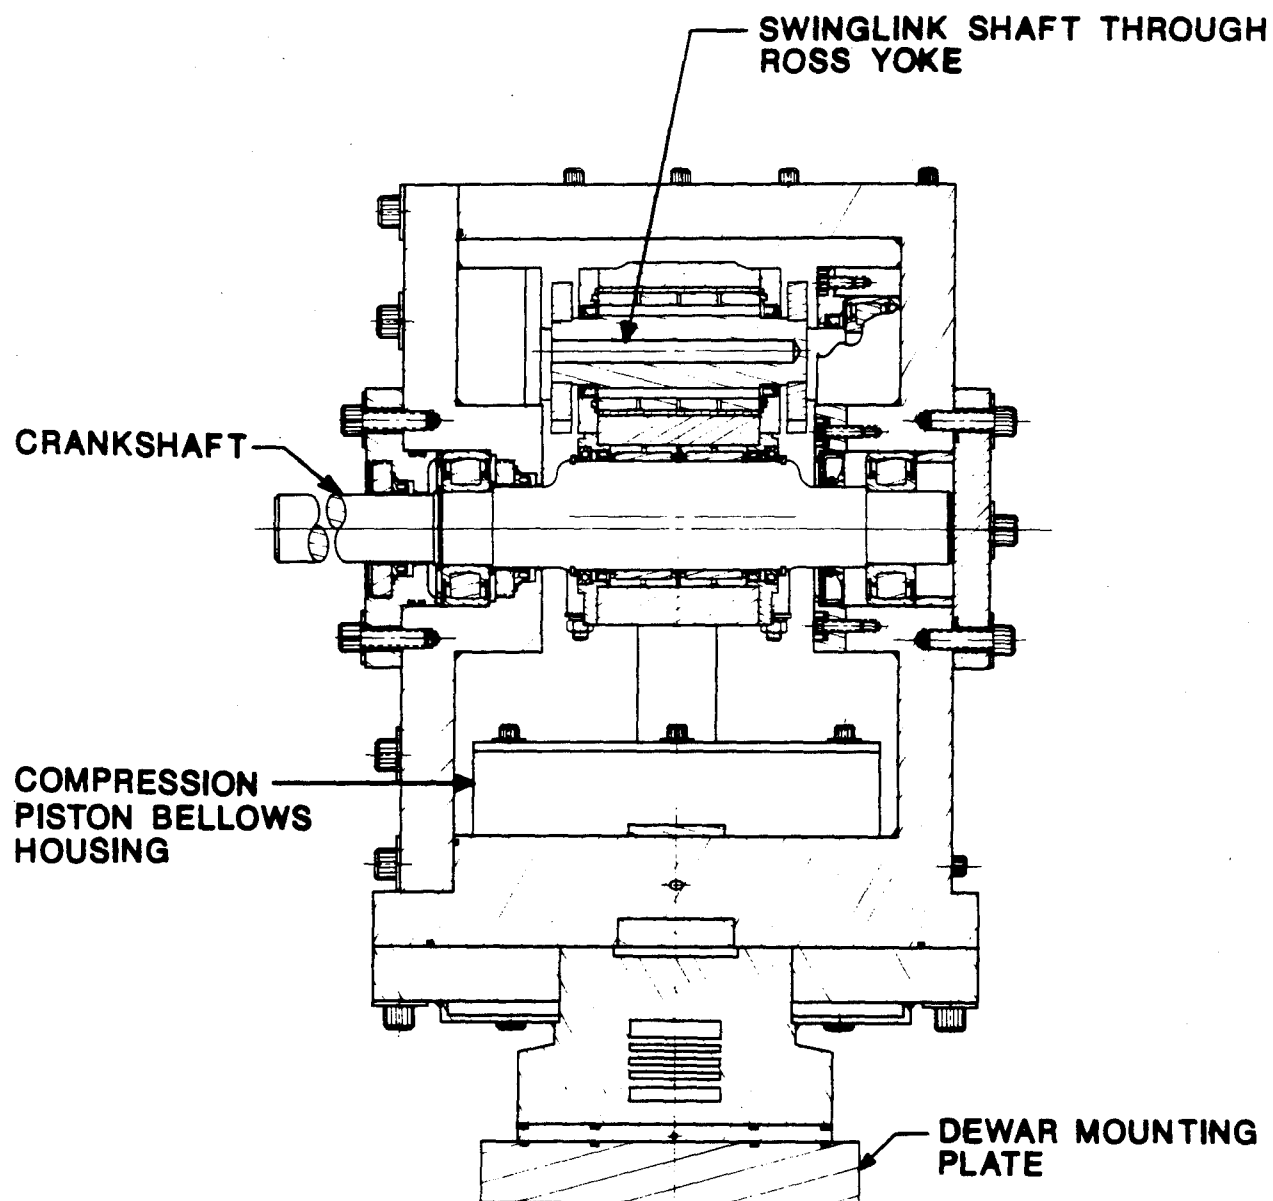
END-VIEW SECTION THROUGH PROTOTYPE CRANKCASE
